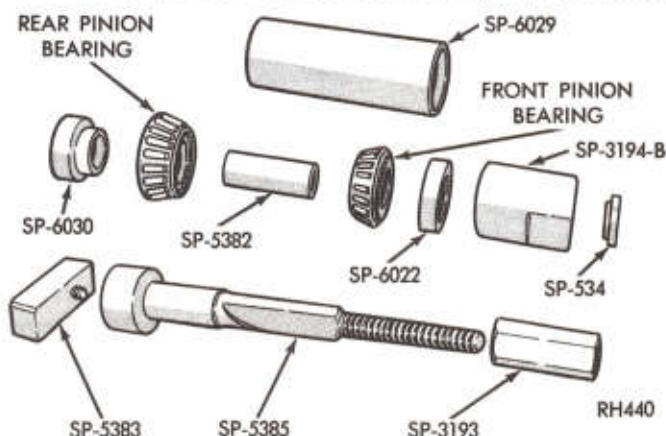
8-3/8 Inch Rear Axle Setting Gauge Tool
